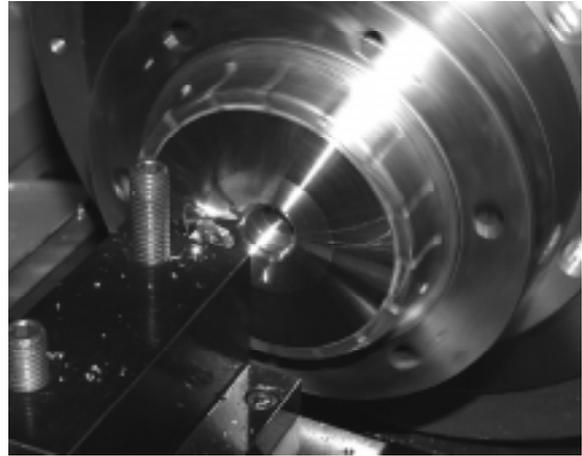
Figure 3: The final machining of a disk with a diamond tool.
